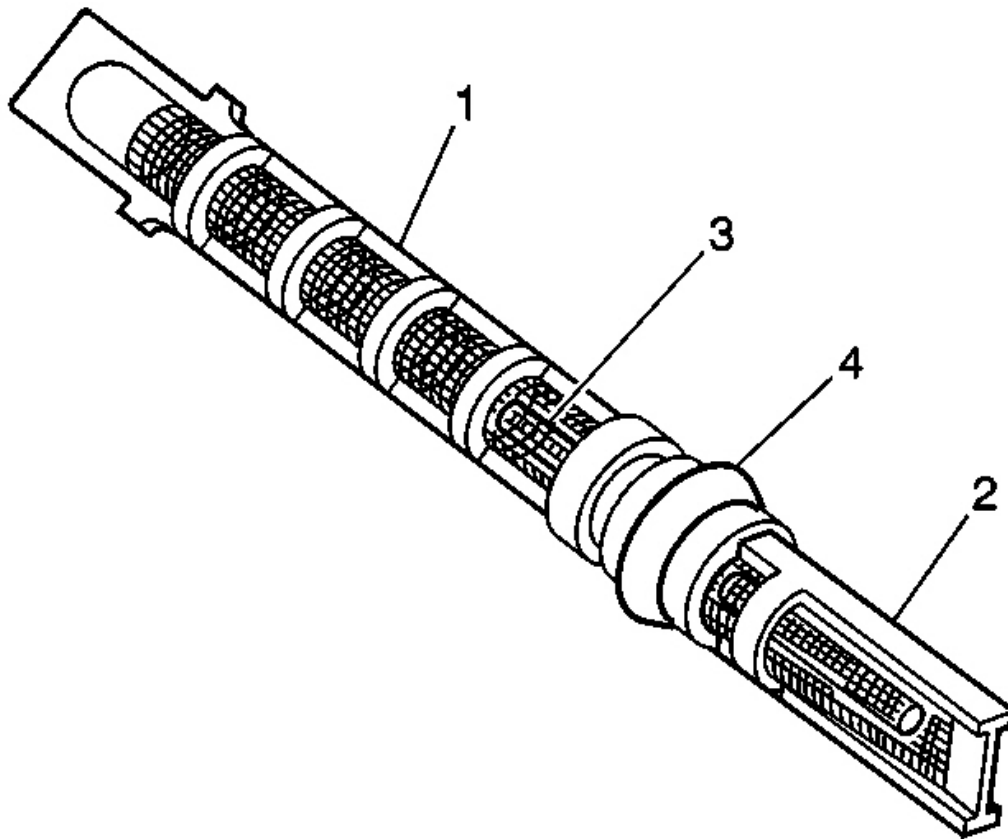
Inspecting Expansion (Orifice) Tube For Damage
